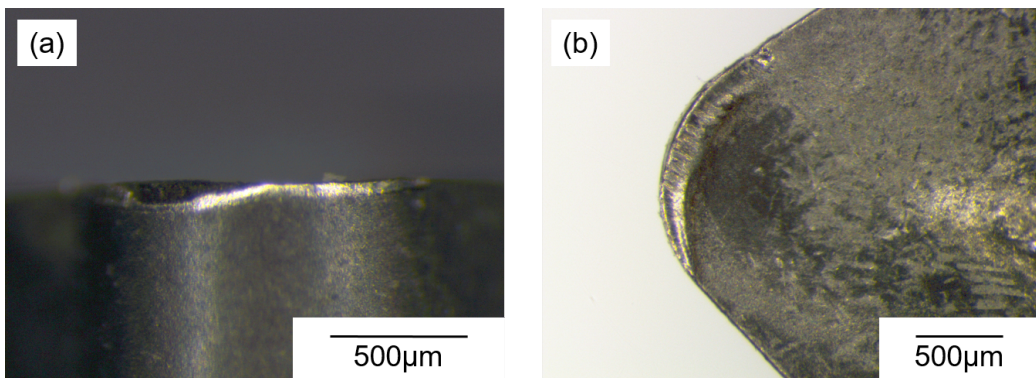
Microscope images showing the degree of tool wear after trial 2.2.1 on billet 3.2. Showing (a) the flank face and (b) the rake face.
